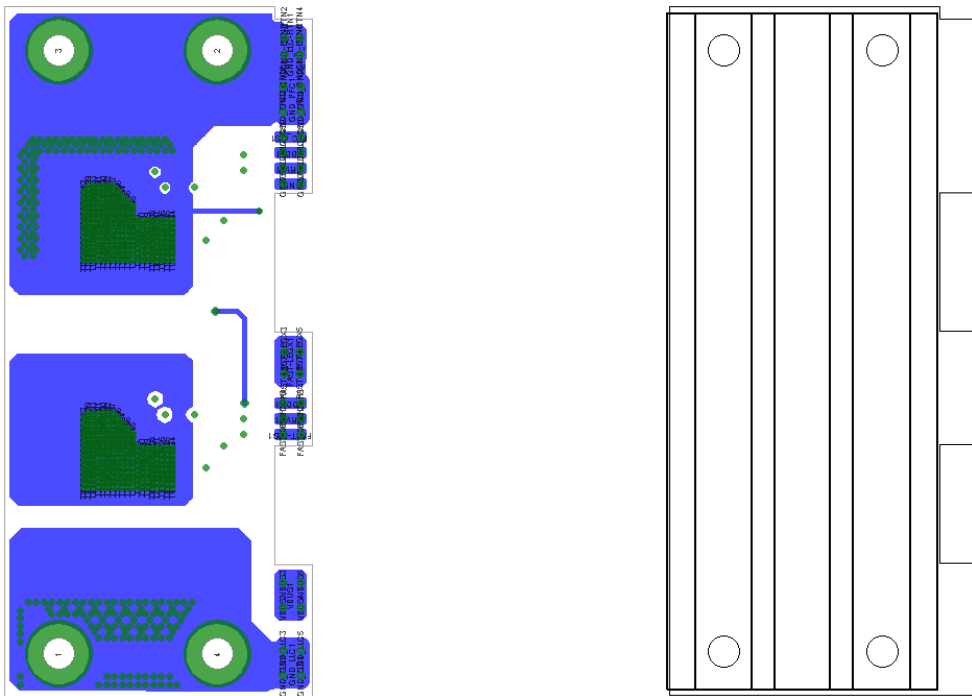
Bottom Layer PCB Layout and Assembly Plan of LLC HALF BRIDGE CARD
